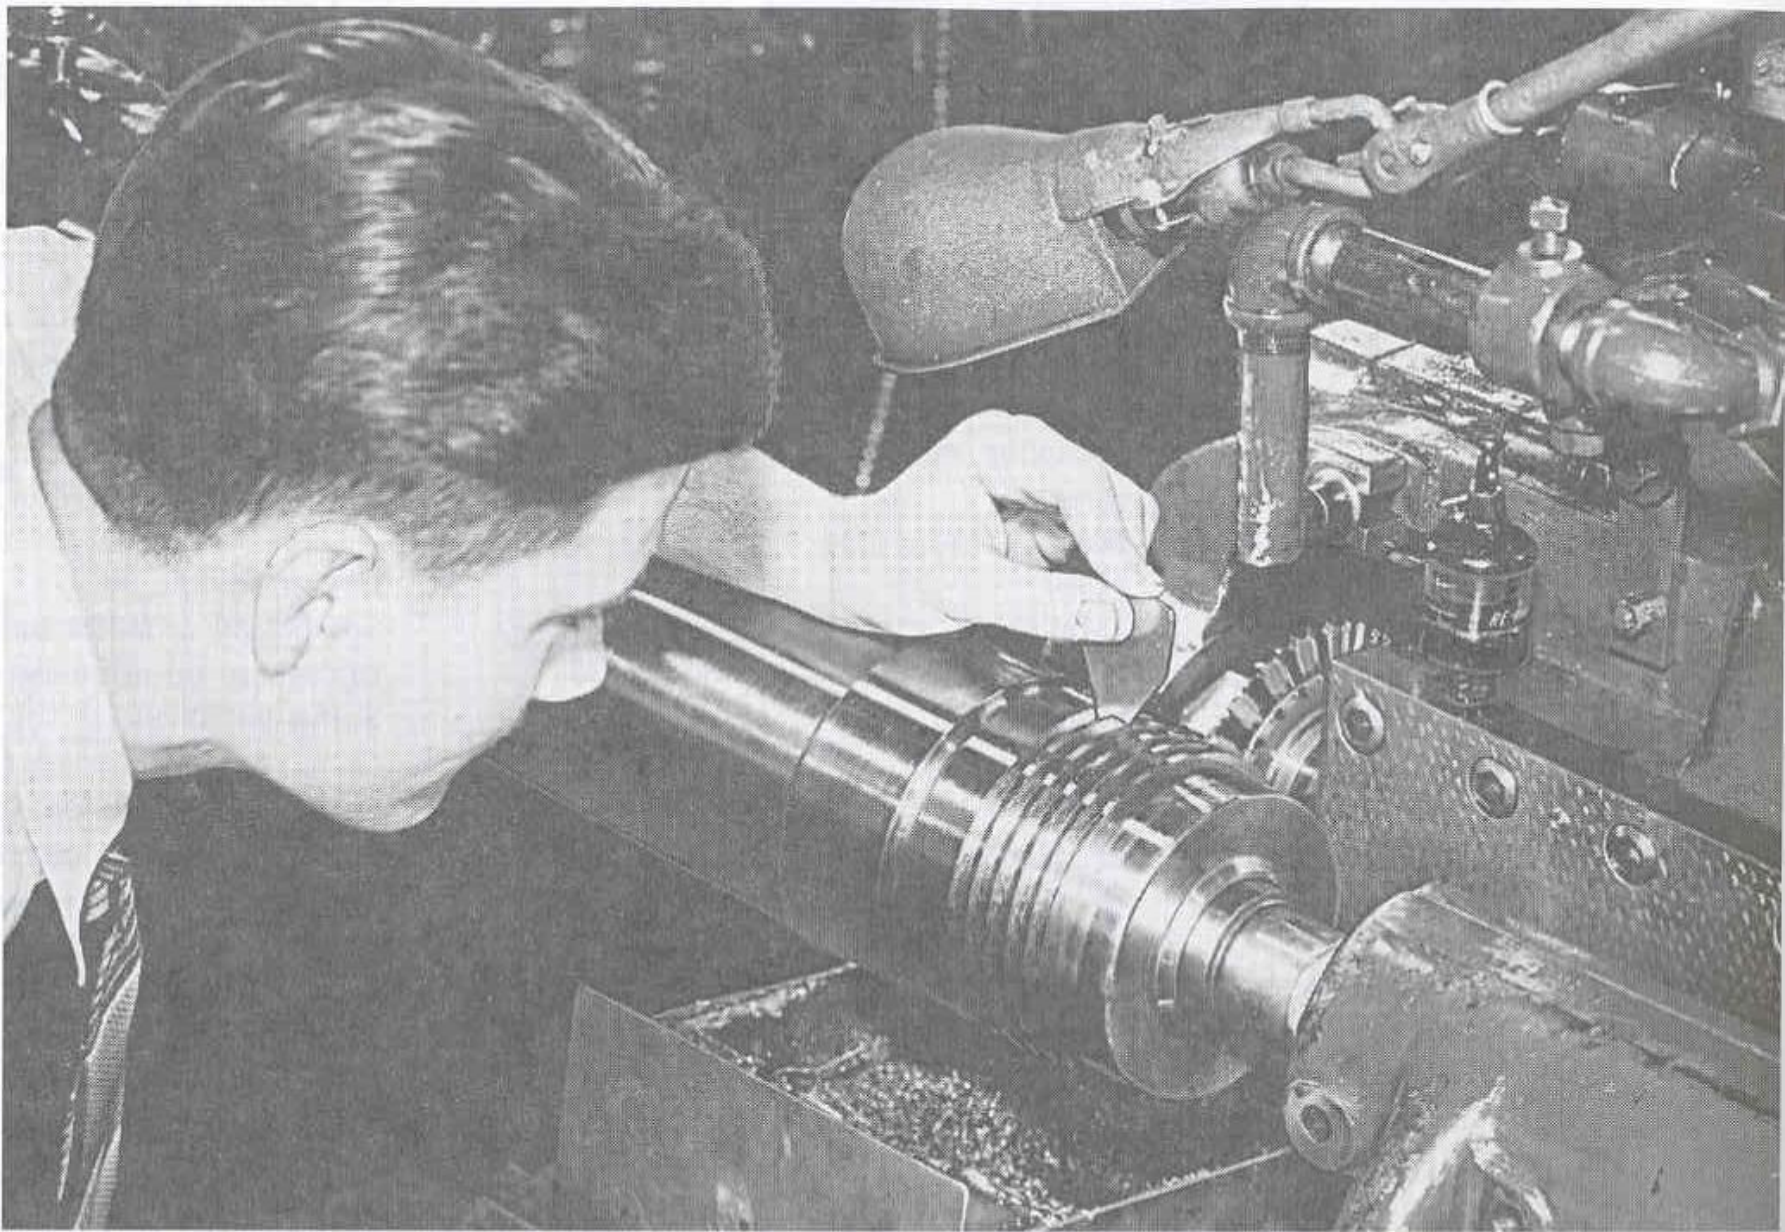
Checking a large thread that was milled with a single-form cutter. The cutter can be seen behind the thread. (Courtesy of Lees-Bradner Company.)
